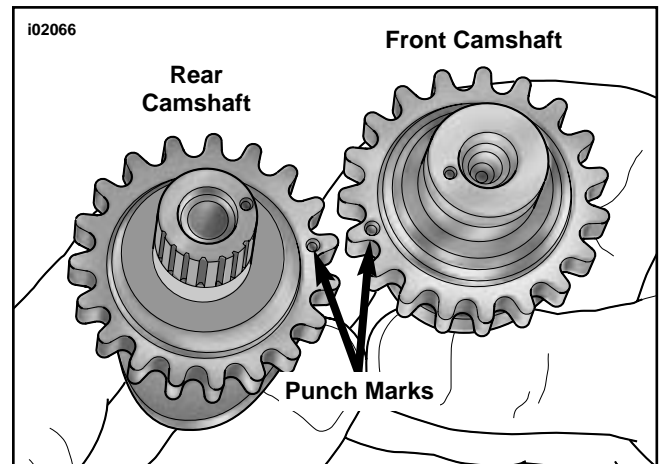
Align Punch Marks on Teeth of Camshaft Sprockets.
